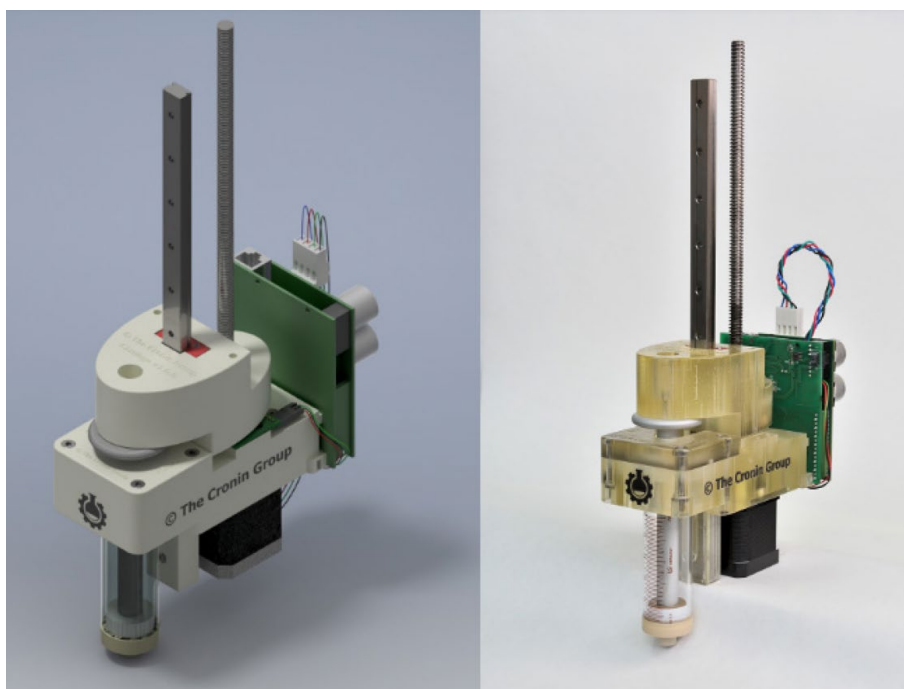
(Left) Autodesk Inventor rendering of the pump assembly. (Right) Photograph of the valve assembly. Reproduced from Steiner et al.² Both are shown with a 10 mL syringe.
